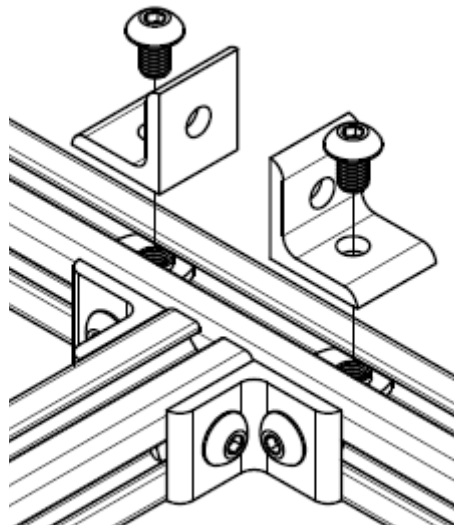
Insert the L bracket into the beam by using M5 screw and T-nut
